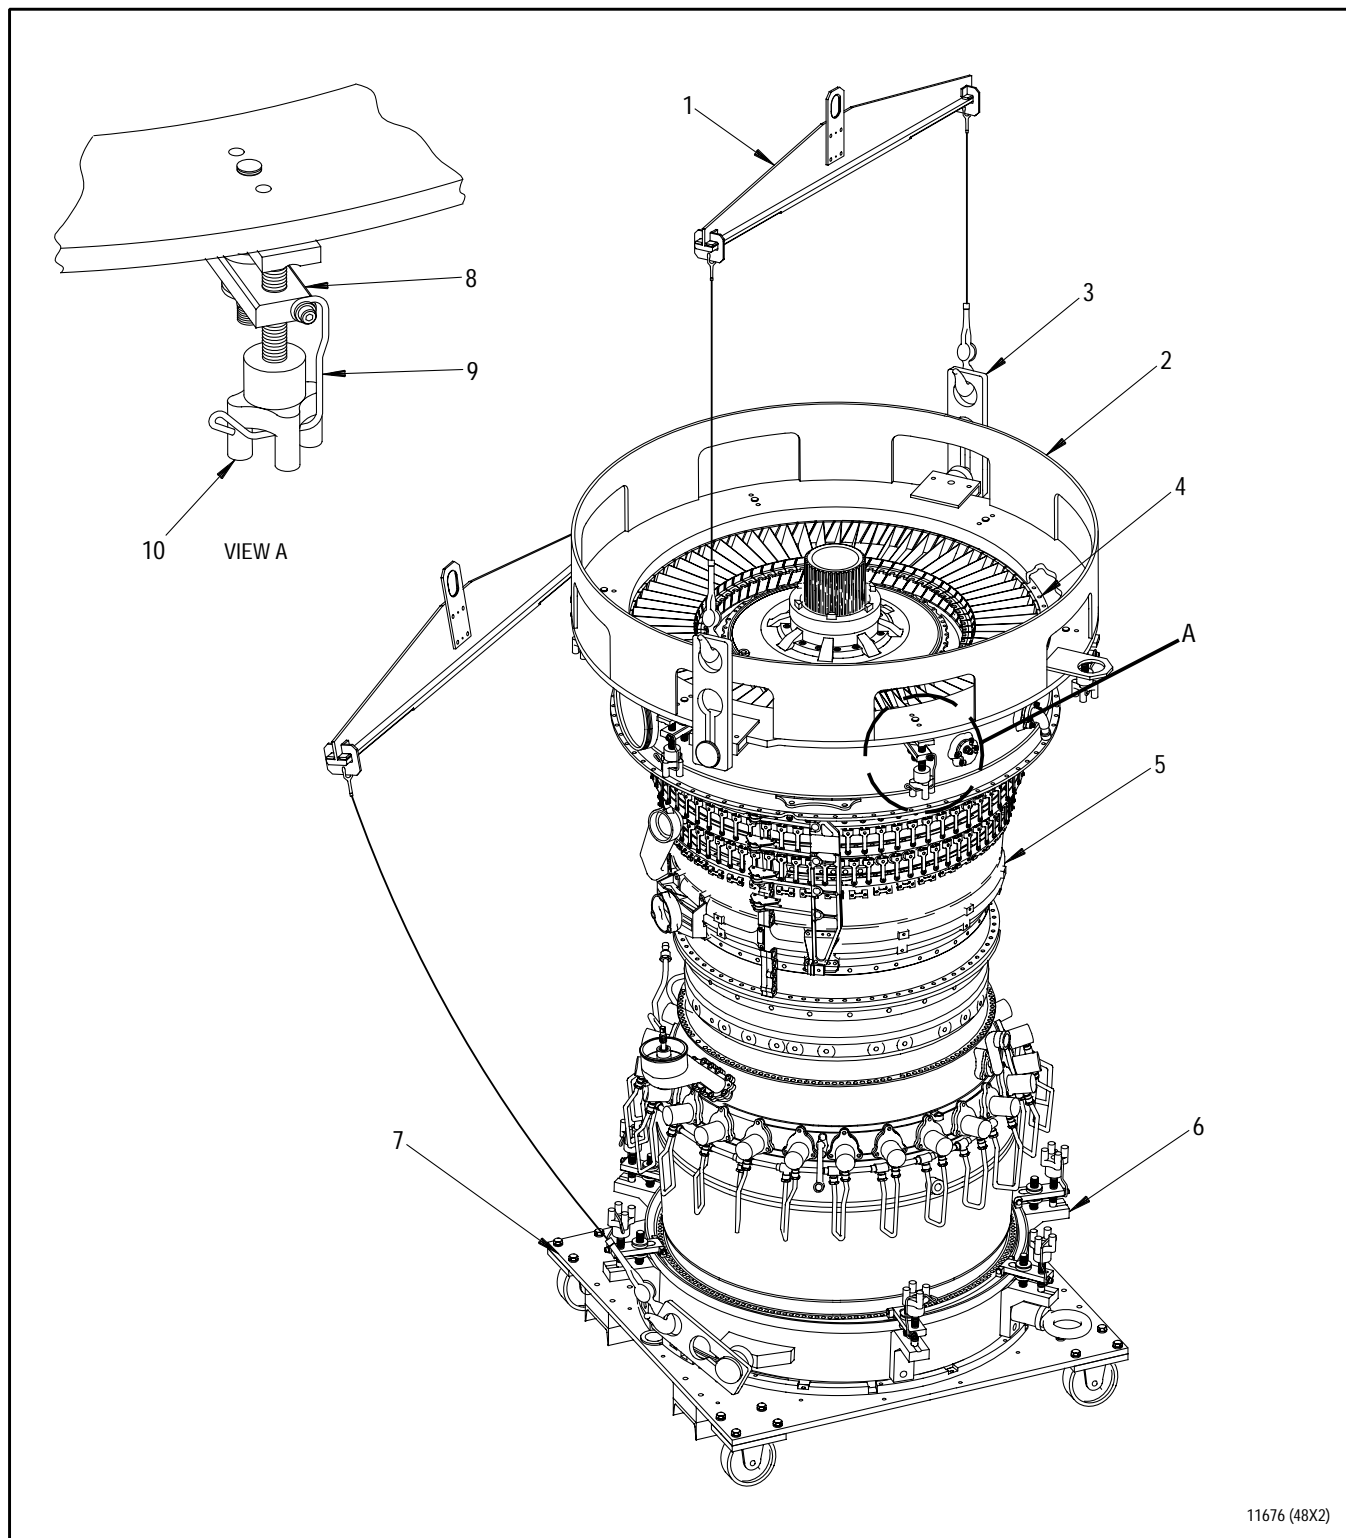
Core Engine Module - Removal From Shipping Container (Sheet 3 of 3)
